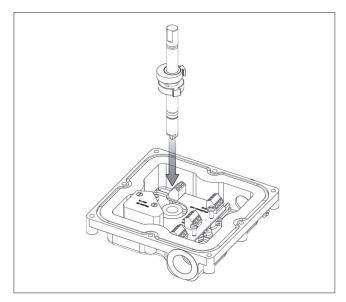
Inserting the shaft to a device with V1, D1 and W1 switches
